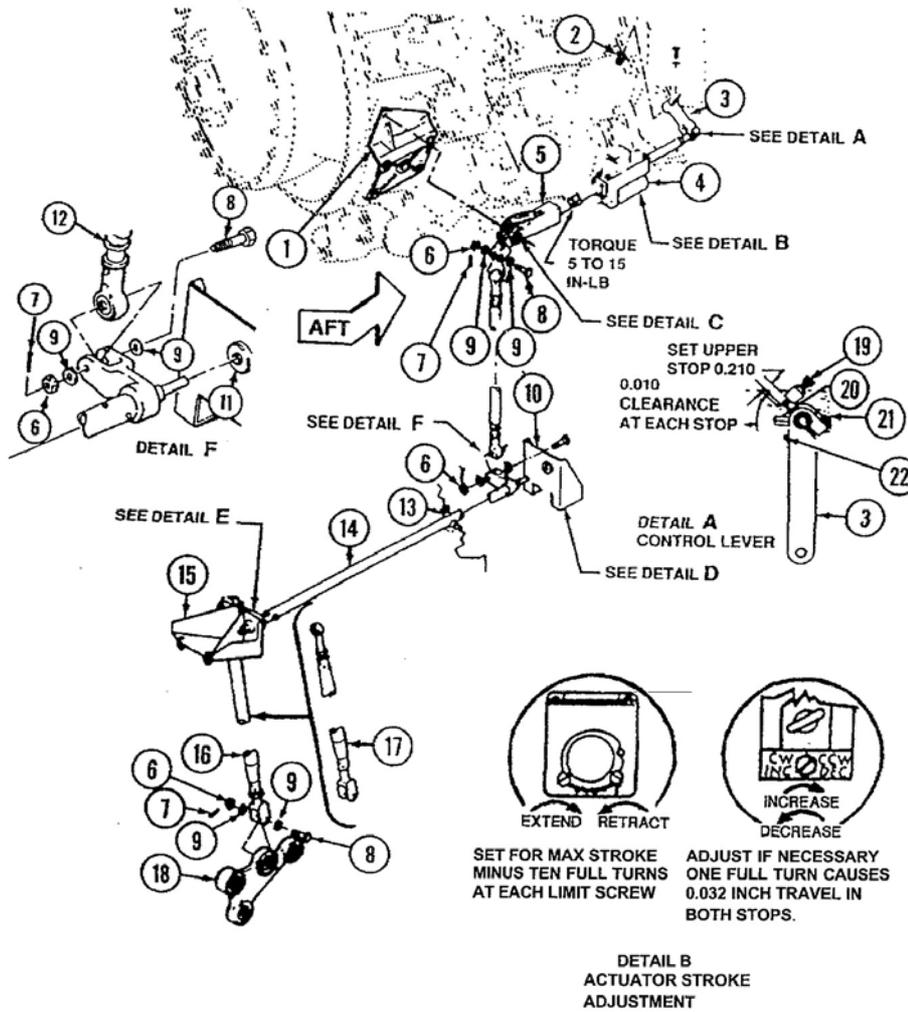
Power Turbine Governor RPM Controls (Sheet 1 of 2)
